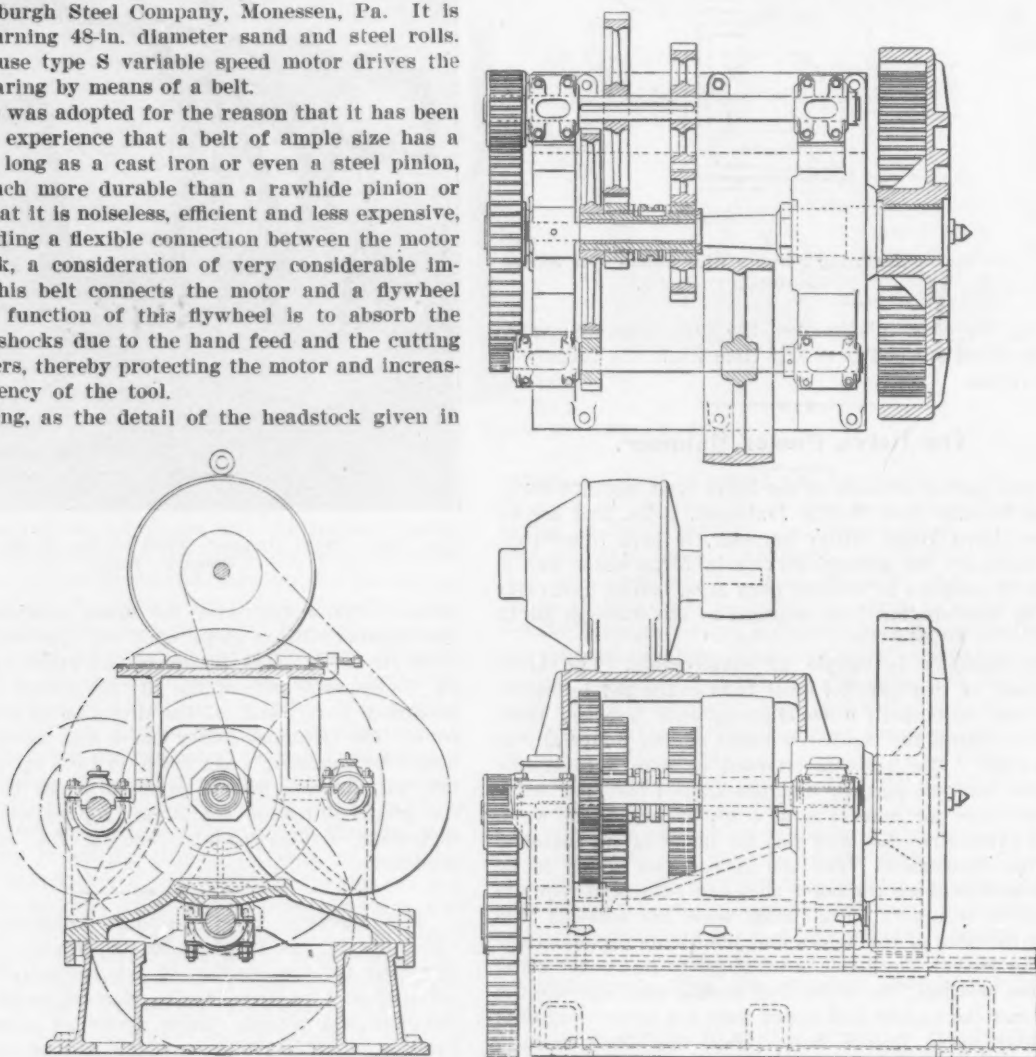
Details of the Headstock of the Garrison Motor Driven Roll Lathe.
